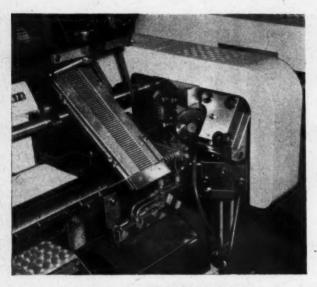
Close-up view of the magazine chute, induction-heating coil and rolls on the May machine
